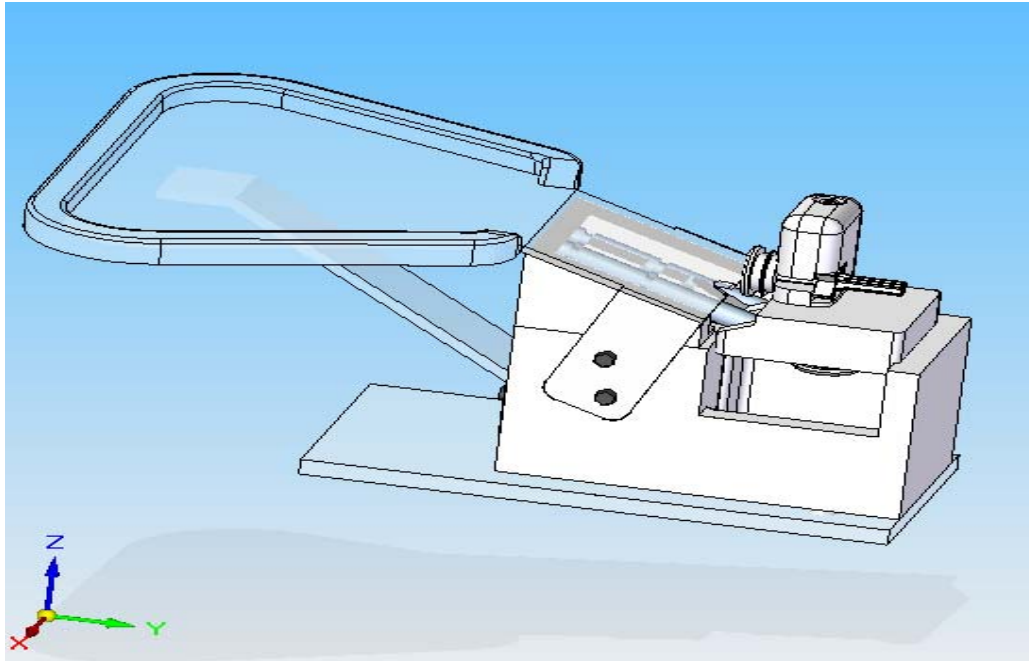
CAD Model of Large O-Ring Fixture
